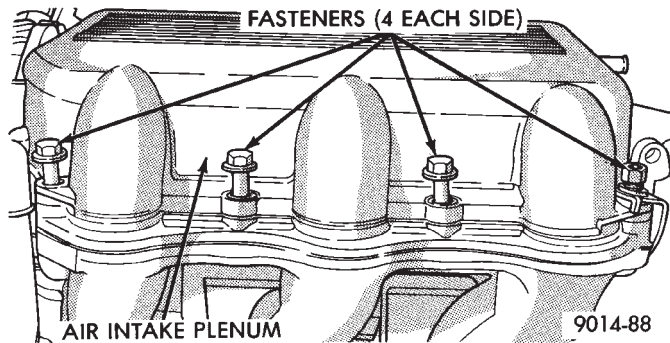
Air Intake Plenum to Intake Manifold Attaching Fasteners
